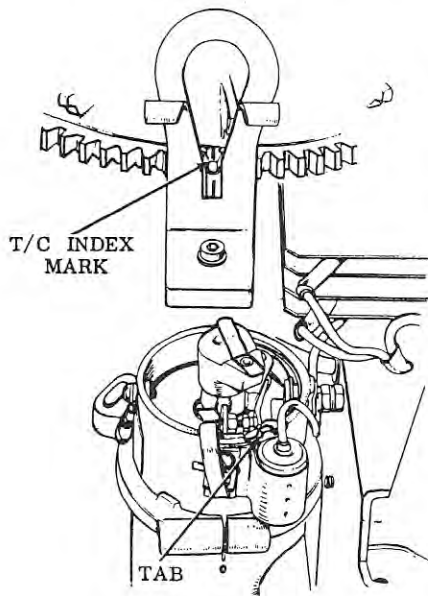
Front view of power head with engine cover removed showing timing marks. Refer to text for details of timing procedure.
